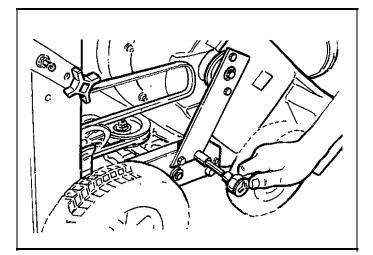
Remove Drive Pulley Bearing Plate Screws
